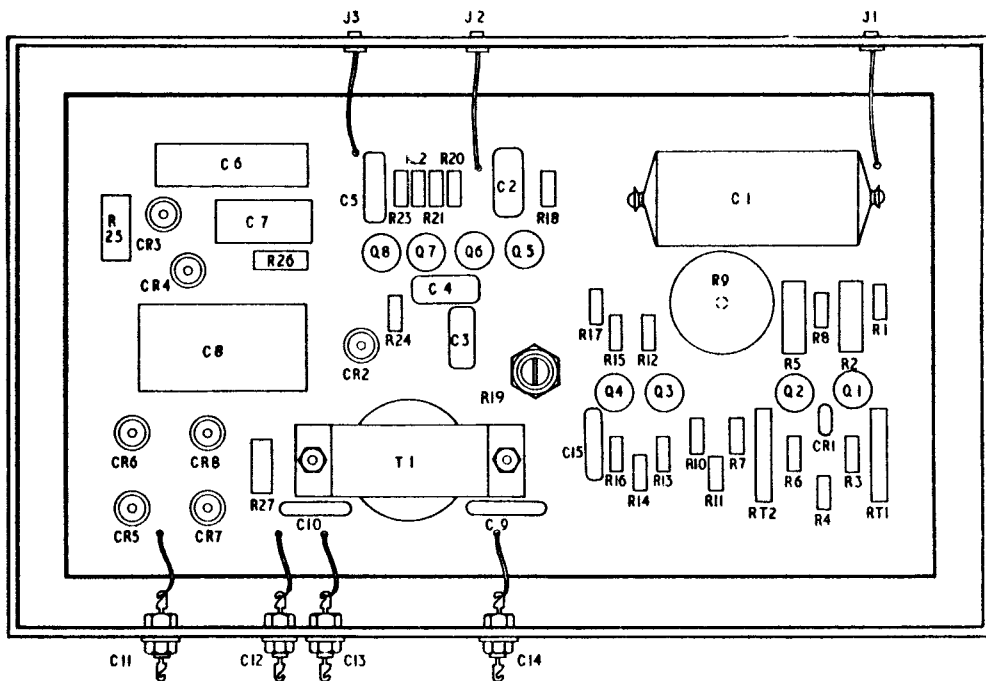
A. Panel regulator (Ref. No. 310D/30001) —component location
